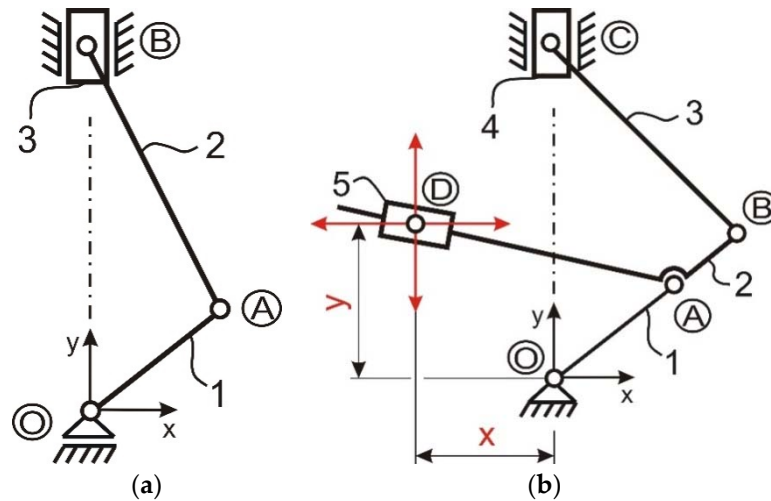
Kinematic schema for two concept of engine mechanism: (a) classic; (b) with oscillating arm.
